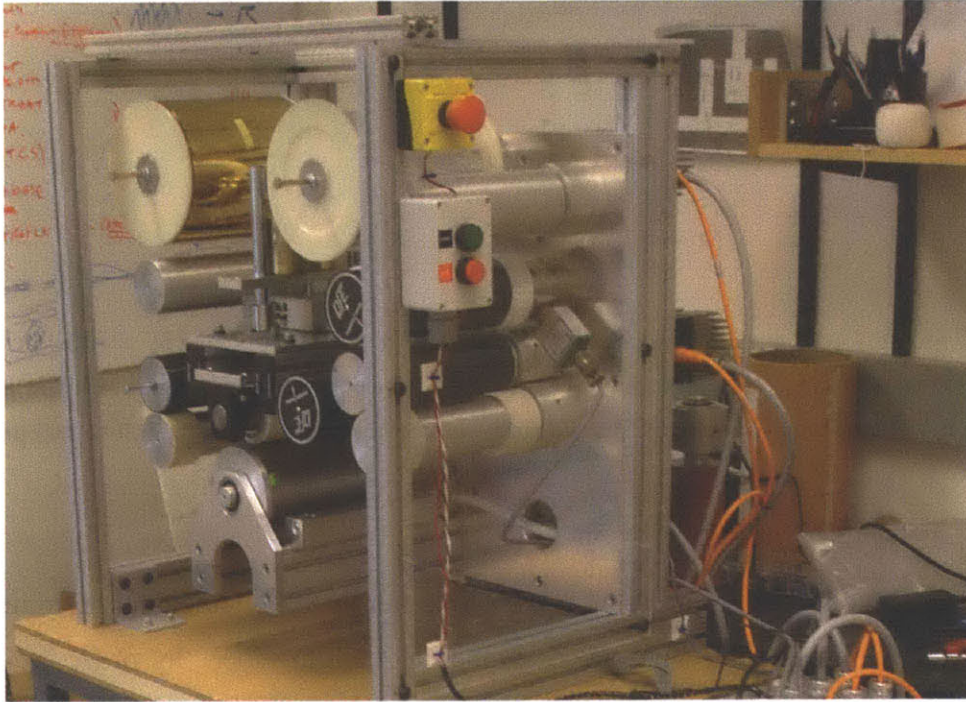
The roll-to-roll microcontact printing machine developed by Stagnaro. This machine achieved successful pattern transfer at web speeds of up to 400 feet per minute, but also demonstrated the need for a precision print head and a continuous stamp.
